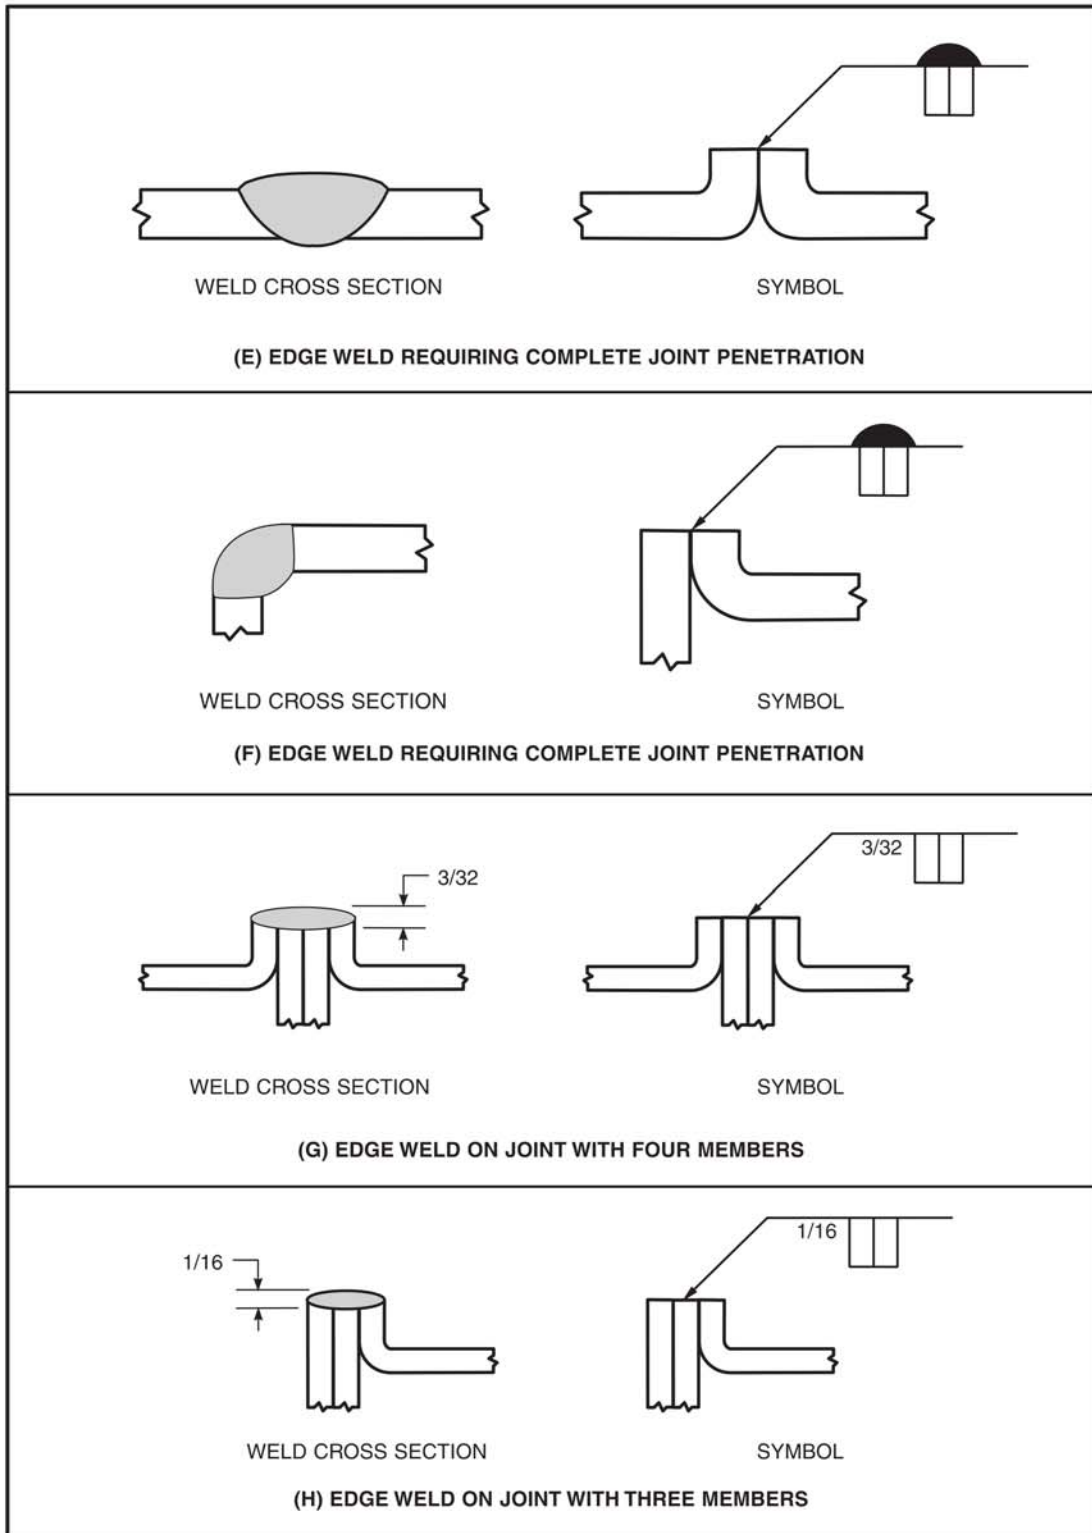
(Continued)—Application of the Edge Weld Symbol
